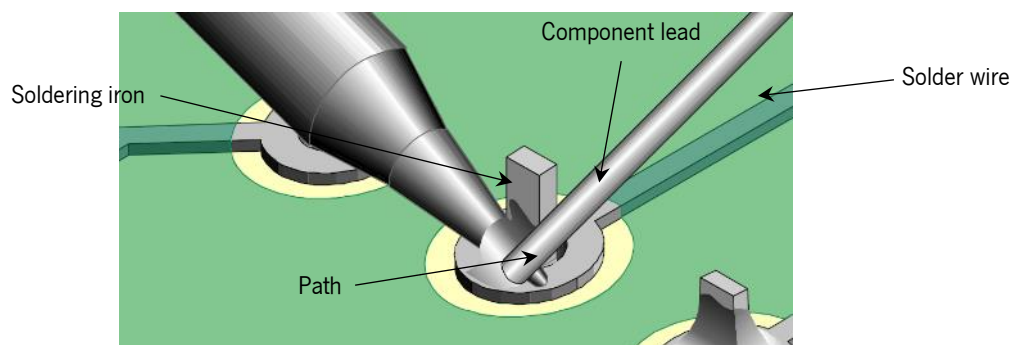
Scheme of a hand soldering procedure of a TH component<sup>[27]</sup>.
